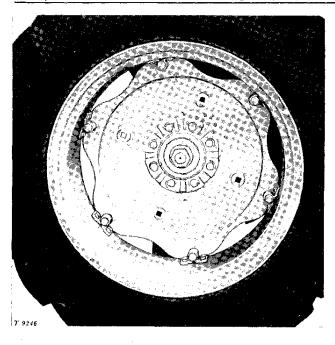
Demountable Rim Wheel (RU or RUS Shown)
